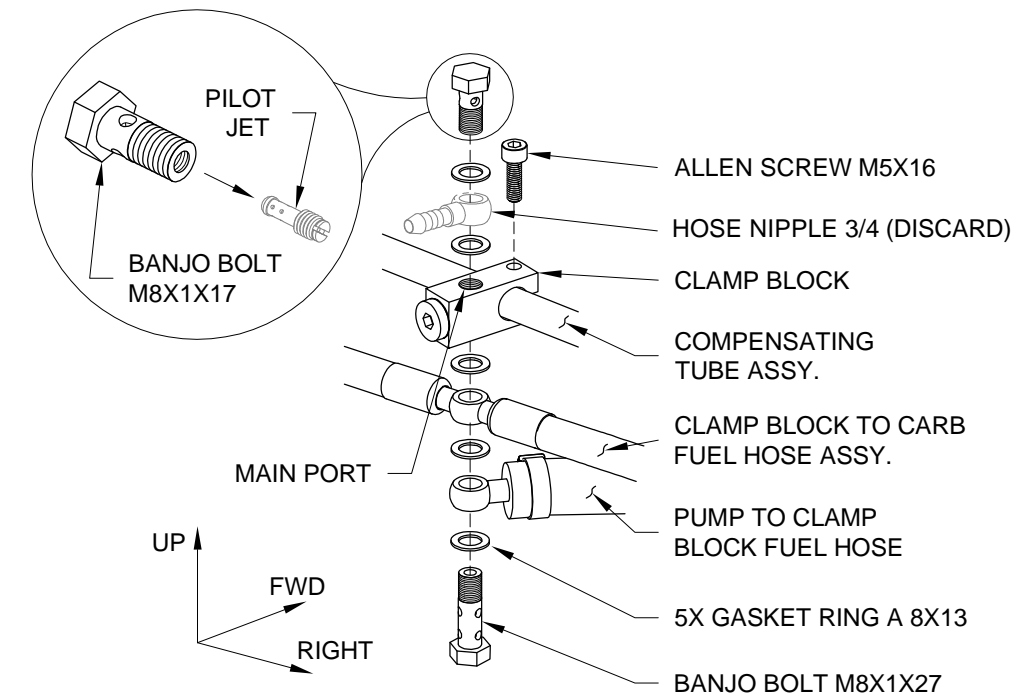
DISASSEMBLE CLAMP BLOCK
